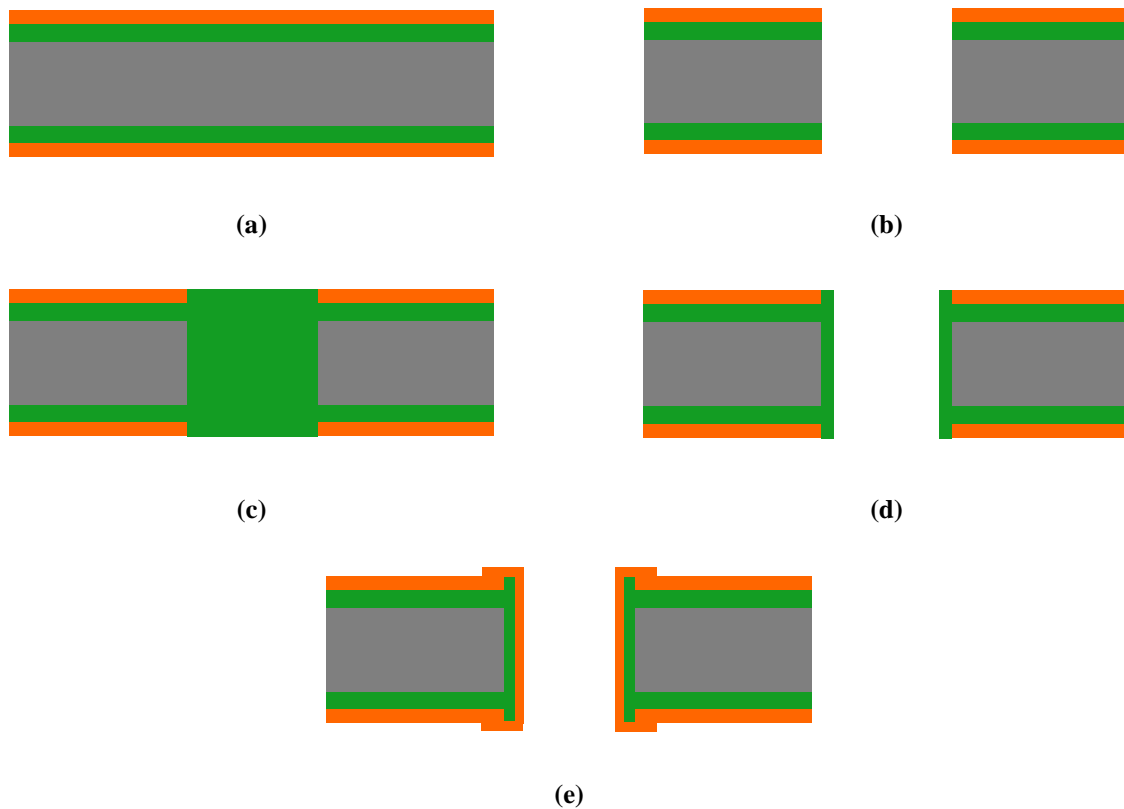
The fabrication process of the vias through PCBs with embedded core: (a) 2-layer PCB with embedded core, (b) first drilling with larger hole size, (c) filling epoxy into the hole, (d) second drilling with smaller hole size, (e) electroplating copper to form the via.
